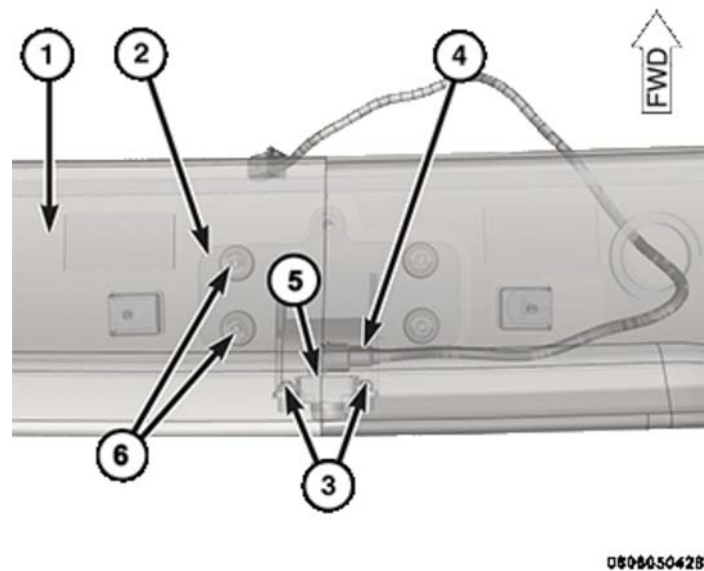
Spoiler Assembly, Rear View Camera, Mounting Bracket, Connectors & Fasteners
